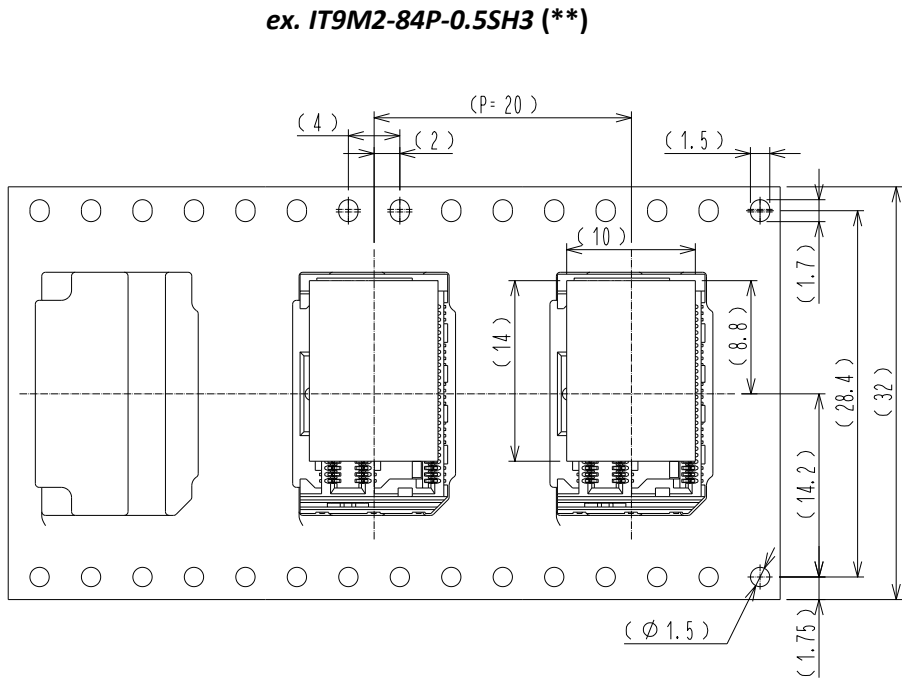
Embossed Carrier Tape for IT9 Receptacle (dimensions in mm)
